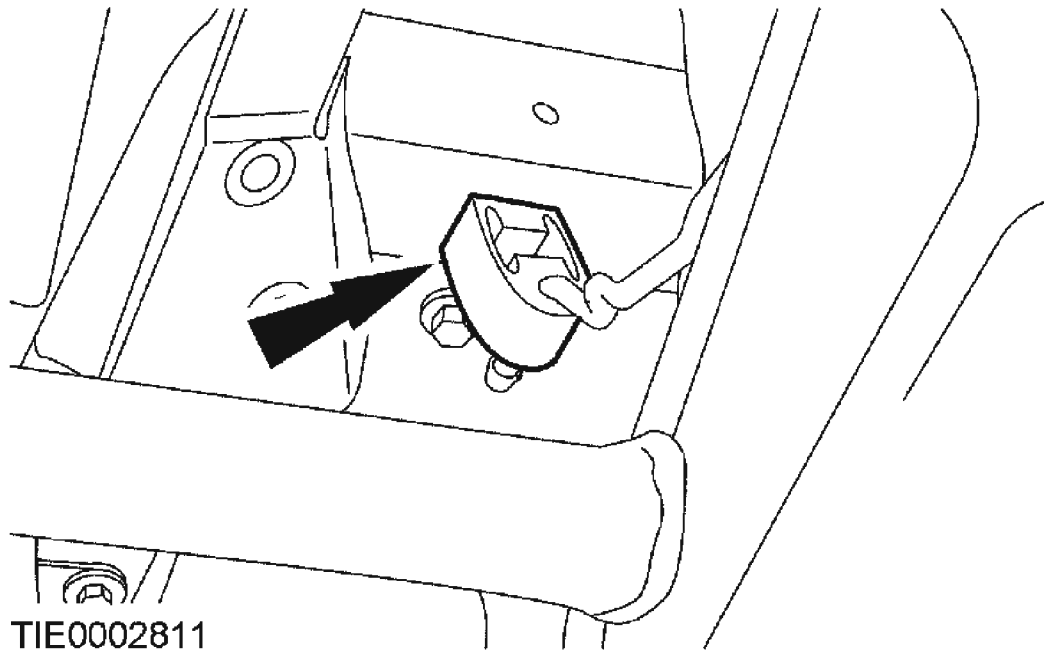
Detaching Front Muffler From Front Exhaust Hanger Insulator
